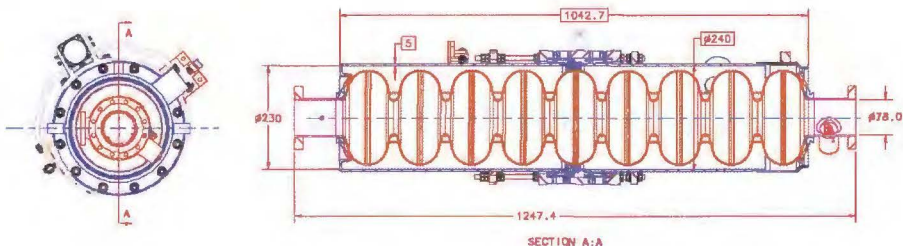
2d draft representing the overall dimension of the 1.3GHz Helium vessel
